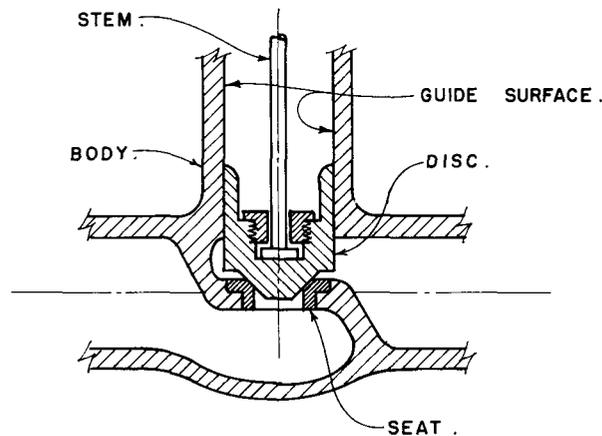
Design for Body-Guided Disc Globe Valve.
